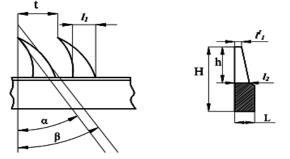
Construction of sawed sampling drum of spinning machine BD-350
